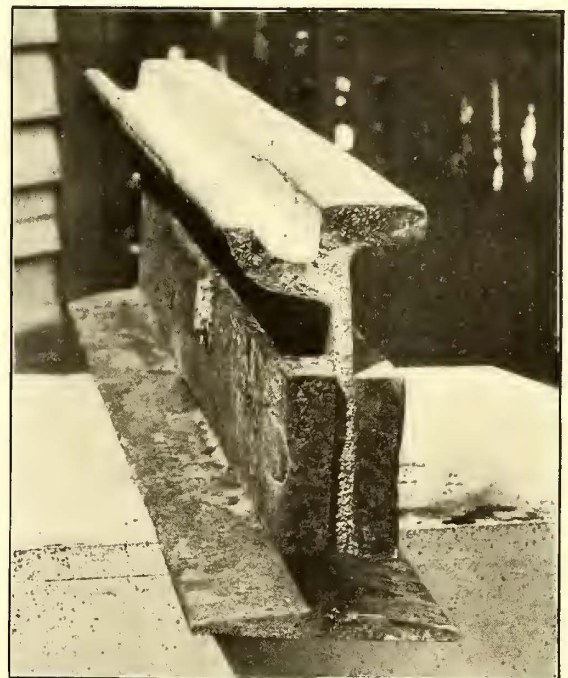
AND 6.—SECTIONS THROUGH END AND CENTER WELDS
